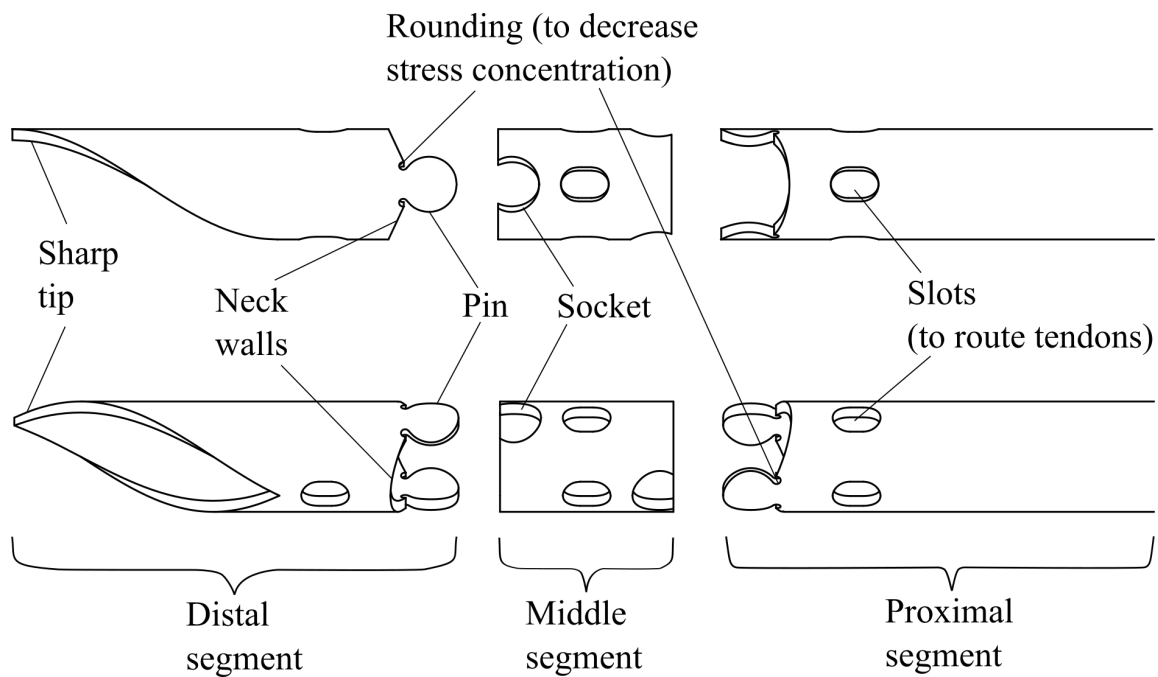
Laser-machined hinge joints embedded on a tube to form a 2 DoF steerable cannula showing an exploded view with the various parts labeled (Note: The joints do not need any assembly)
